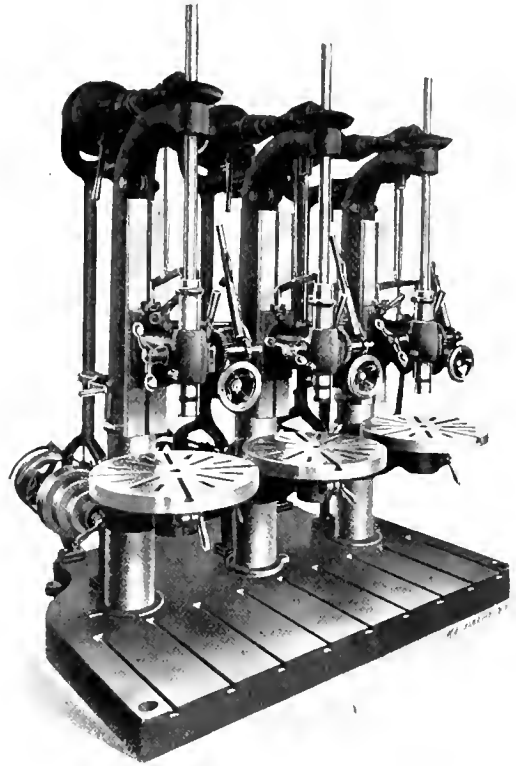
Twenty-six inch, Three-spindle Gang Drill
